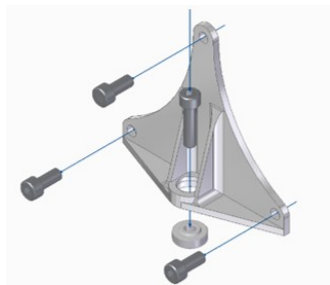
Exploded view of the wheel hub carrier support assembly (bolts and radial spherical plain bearing)
